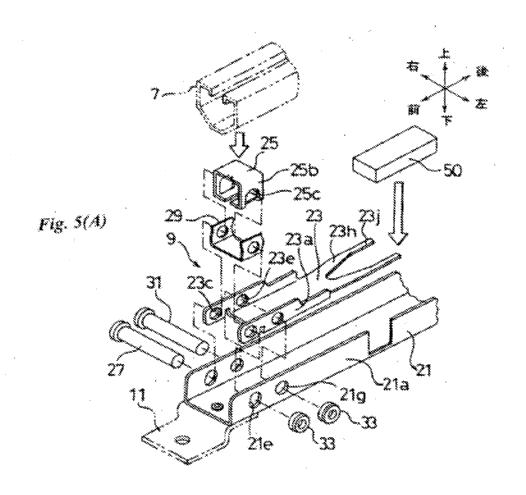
(A) of the present application shows an exploded perspective view of a prior art seat weighing device
